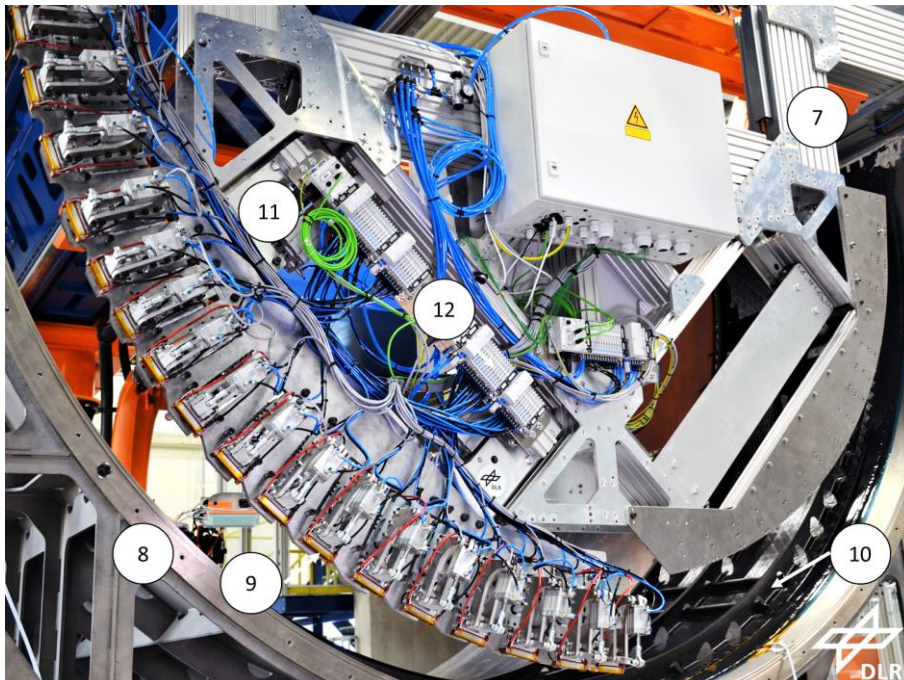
Weld bridge responsible for clip positioning and fixation during ultrasonic spot welding, as well as the frame integration by resistance welding
